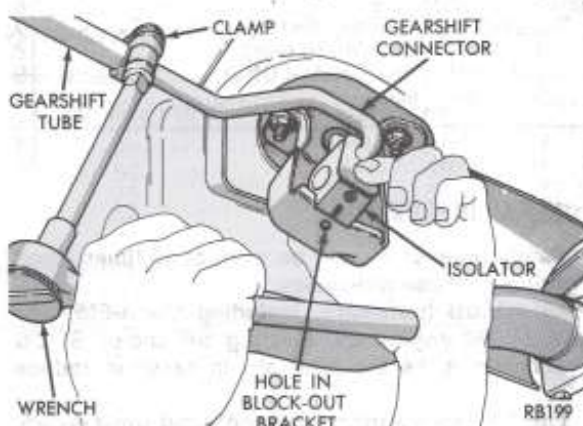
Adjusting Gearshift Linkage (L-Body)
